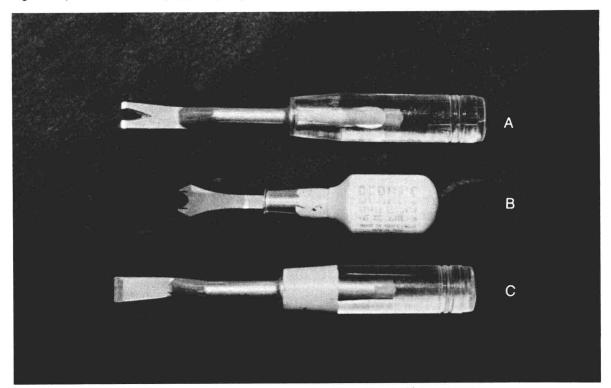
Stripping tools: (A) claw tool. (B) staple remover (patented by Berry) (C) ripping tool.
